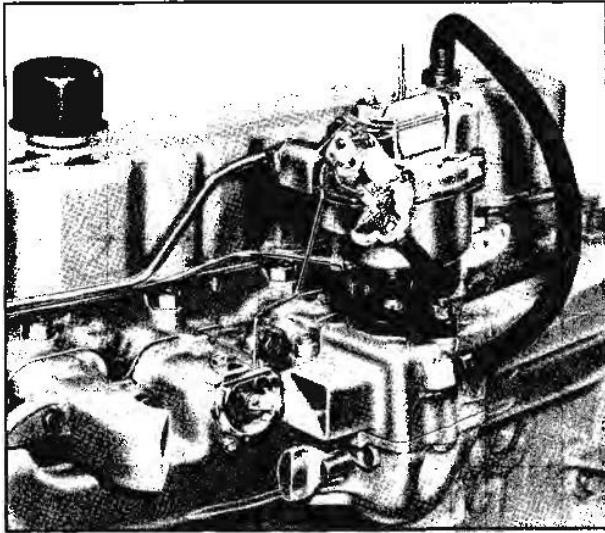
B-8 Thermostatic Coil and Connecting Rod
